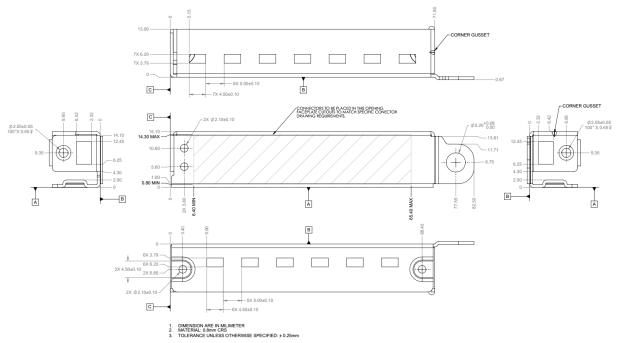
and Figure 10 shows the standard Small Card form factor I/O bracket with a latching lever assembly
